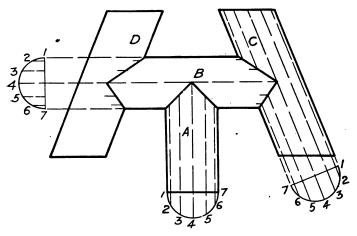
Elevation of a Chimney Cap, or Ventilator Head.
